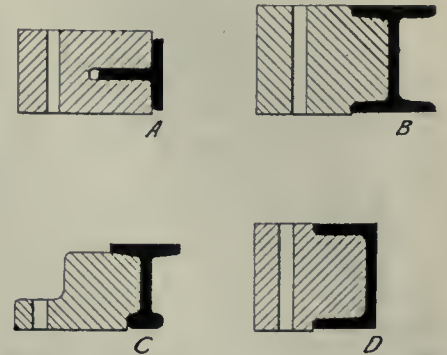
SECTIONS THROUGH BENDING BLOCKS.
